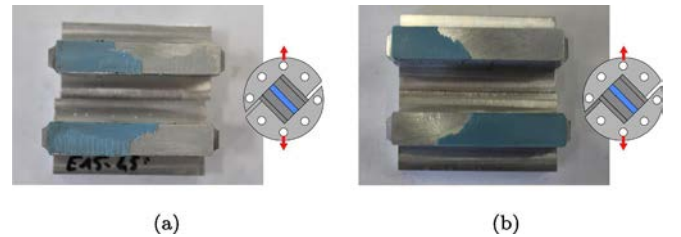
Fracture surfaces on Arcan samples tested under shear-tension loading at a loading rate of (a) 0.2 kN/s and (b) 2.0 kN/s.
